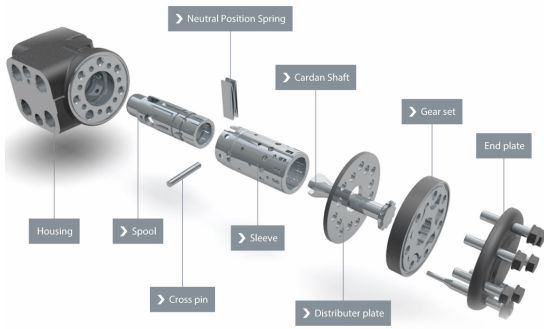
Exploded view of a orbital steering unit (OSP).
